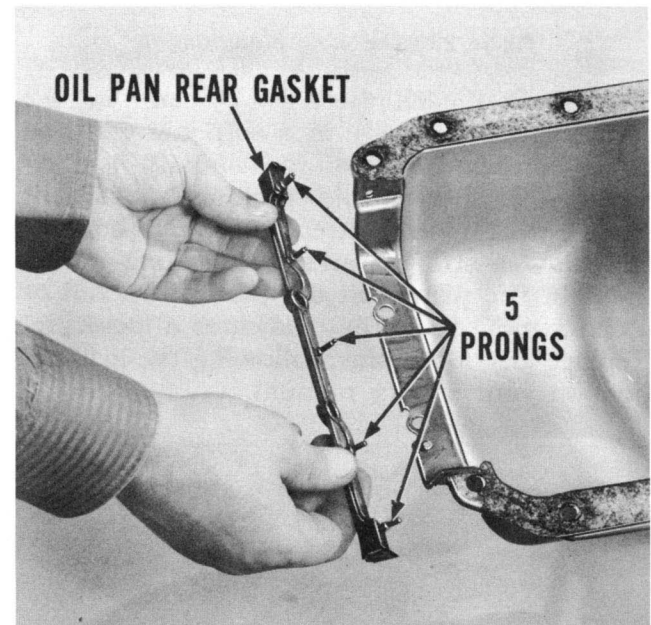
Installing the five-prong oil pan rear gasket for the slant-six engine
